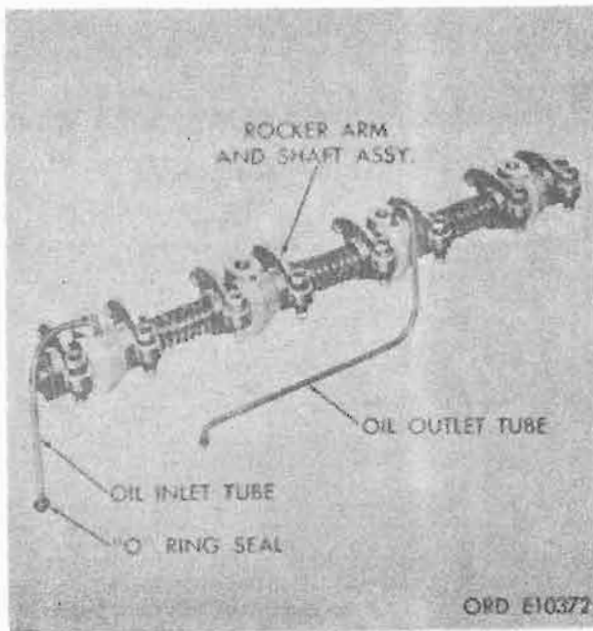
Valve rocker arm and shaft assembly with oil outlet and outlet tubes.
